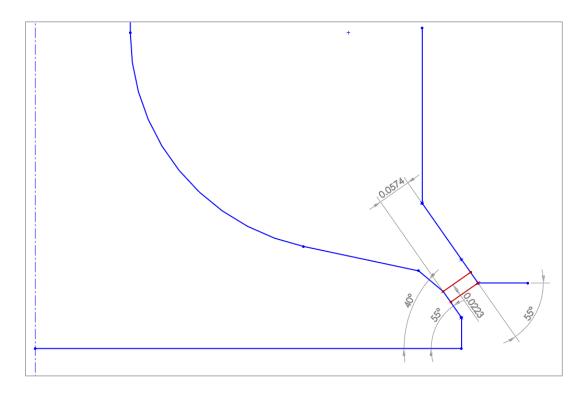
Drawing of the 55° valve and seat opened at 0.1 inches
